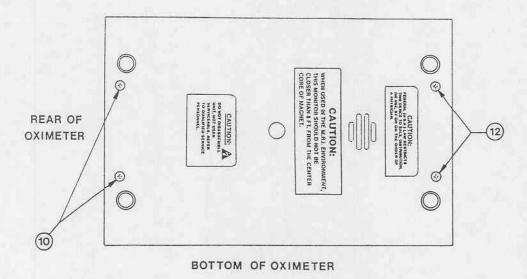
Remove the Rear Panel/Controller board and the Front Panel.
